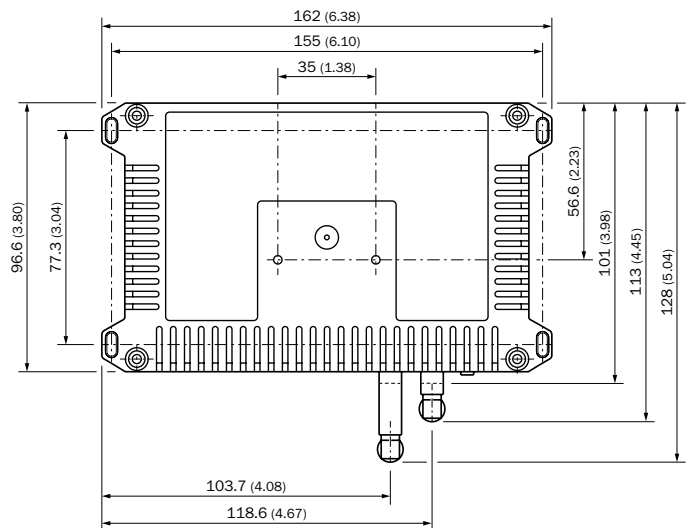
TDC-E dimensions and mounting holes (dimensions in millimeter (inch)).
